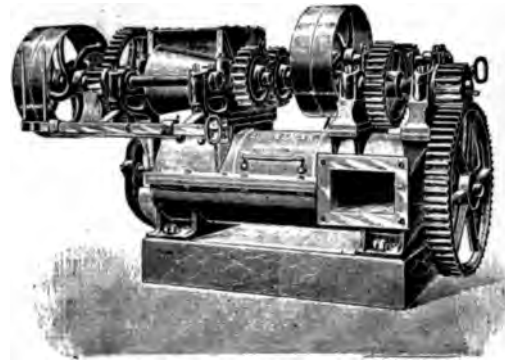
Horizontal Pug-mill with Crushing Cones (Jäger).
